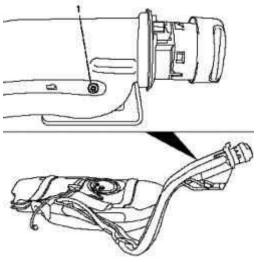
Mounting the fuel water separator: 1 - bolt
